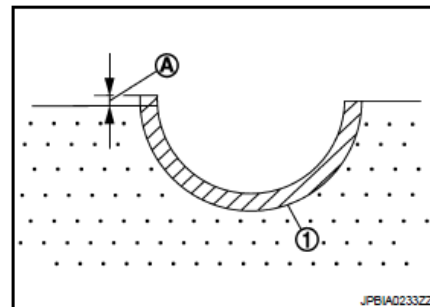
Identifying Crush Height Of Connecting Rod Bearing
